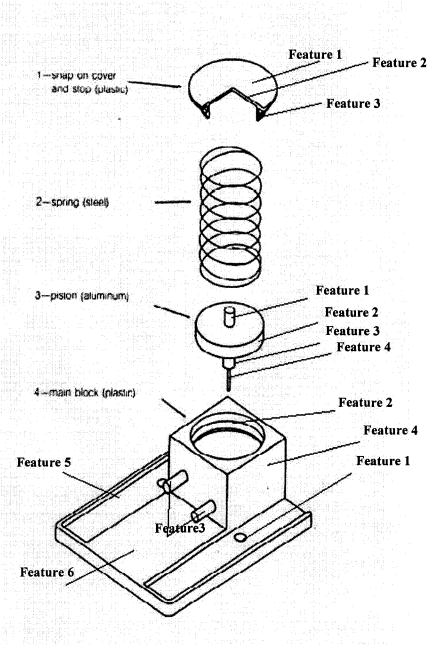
illustrates Example 2- Pneumatic Piston sub-assembly after applying DFA method.
